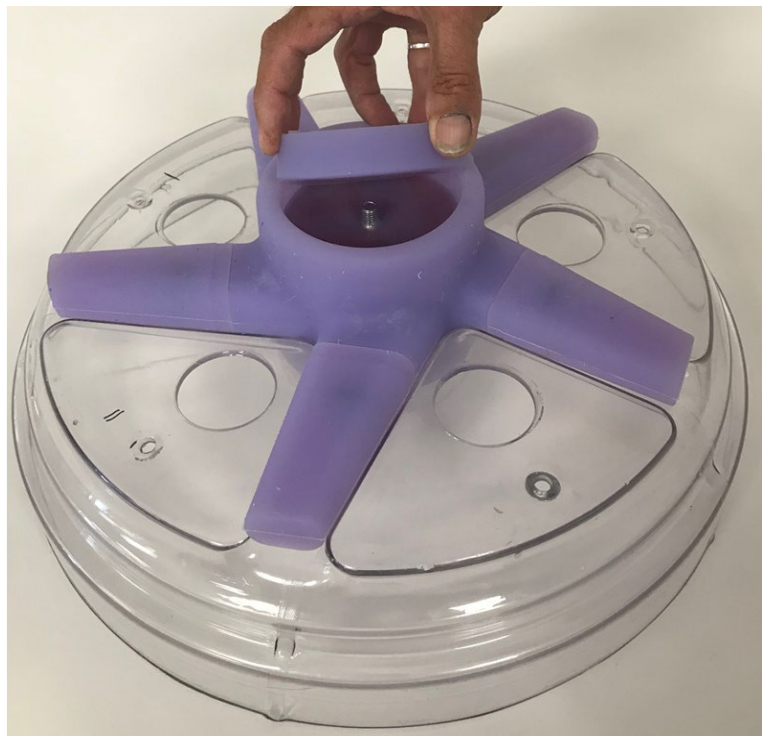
Multi part removable silicone bladder. Photo courtesy of Composite Integration
